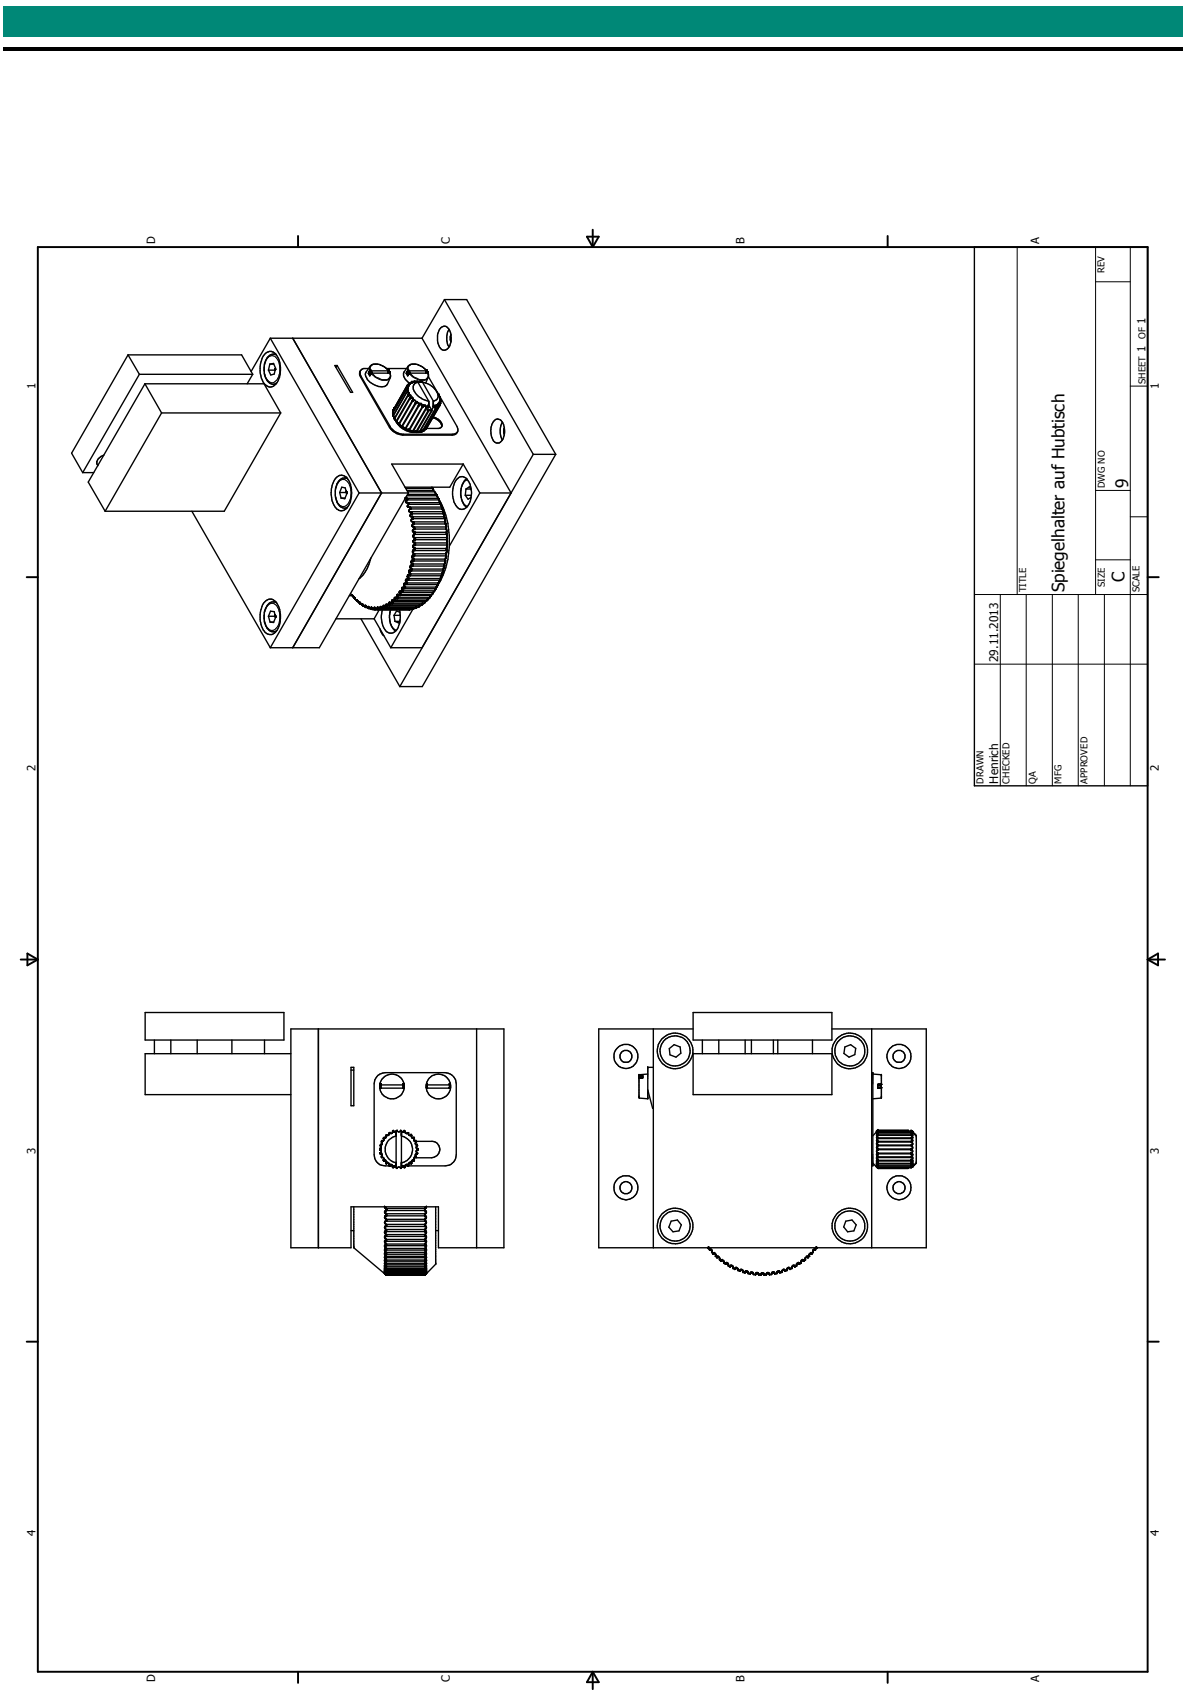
Technical drawing of the mirror mount the vertical stage.
